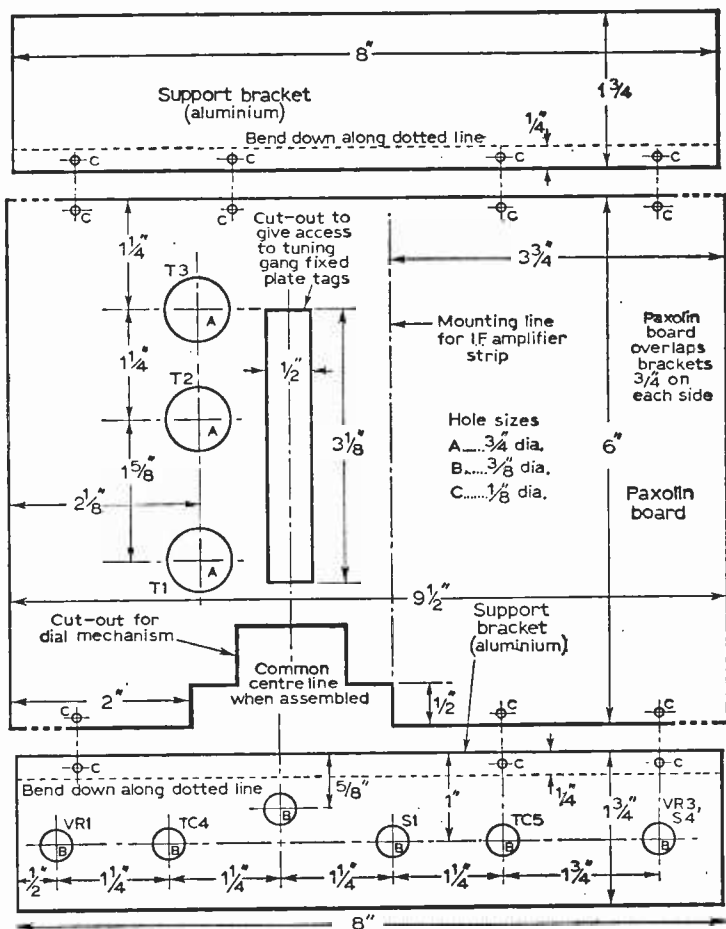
Dimensions of the paxolin board and its aluminium supports.
